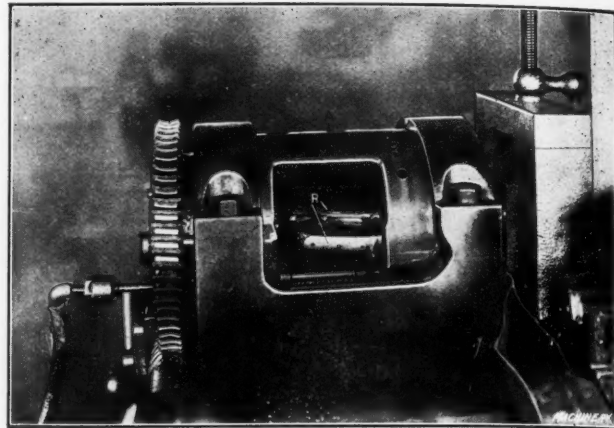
Special Attachment on Lincoln Milling Machines used for finishing Cartridge Chamber of Receiver
